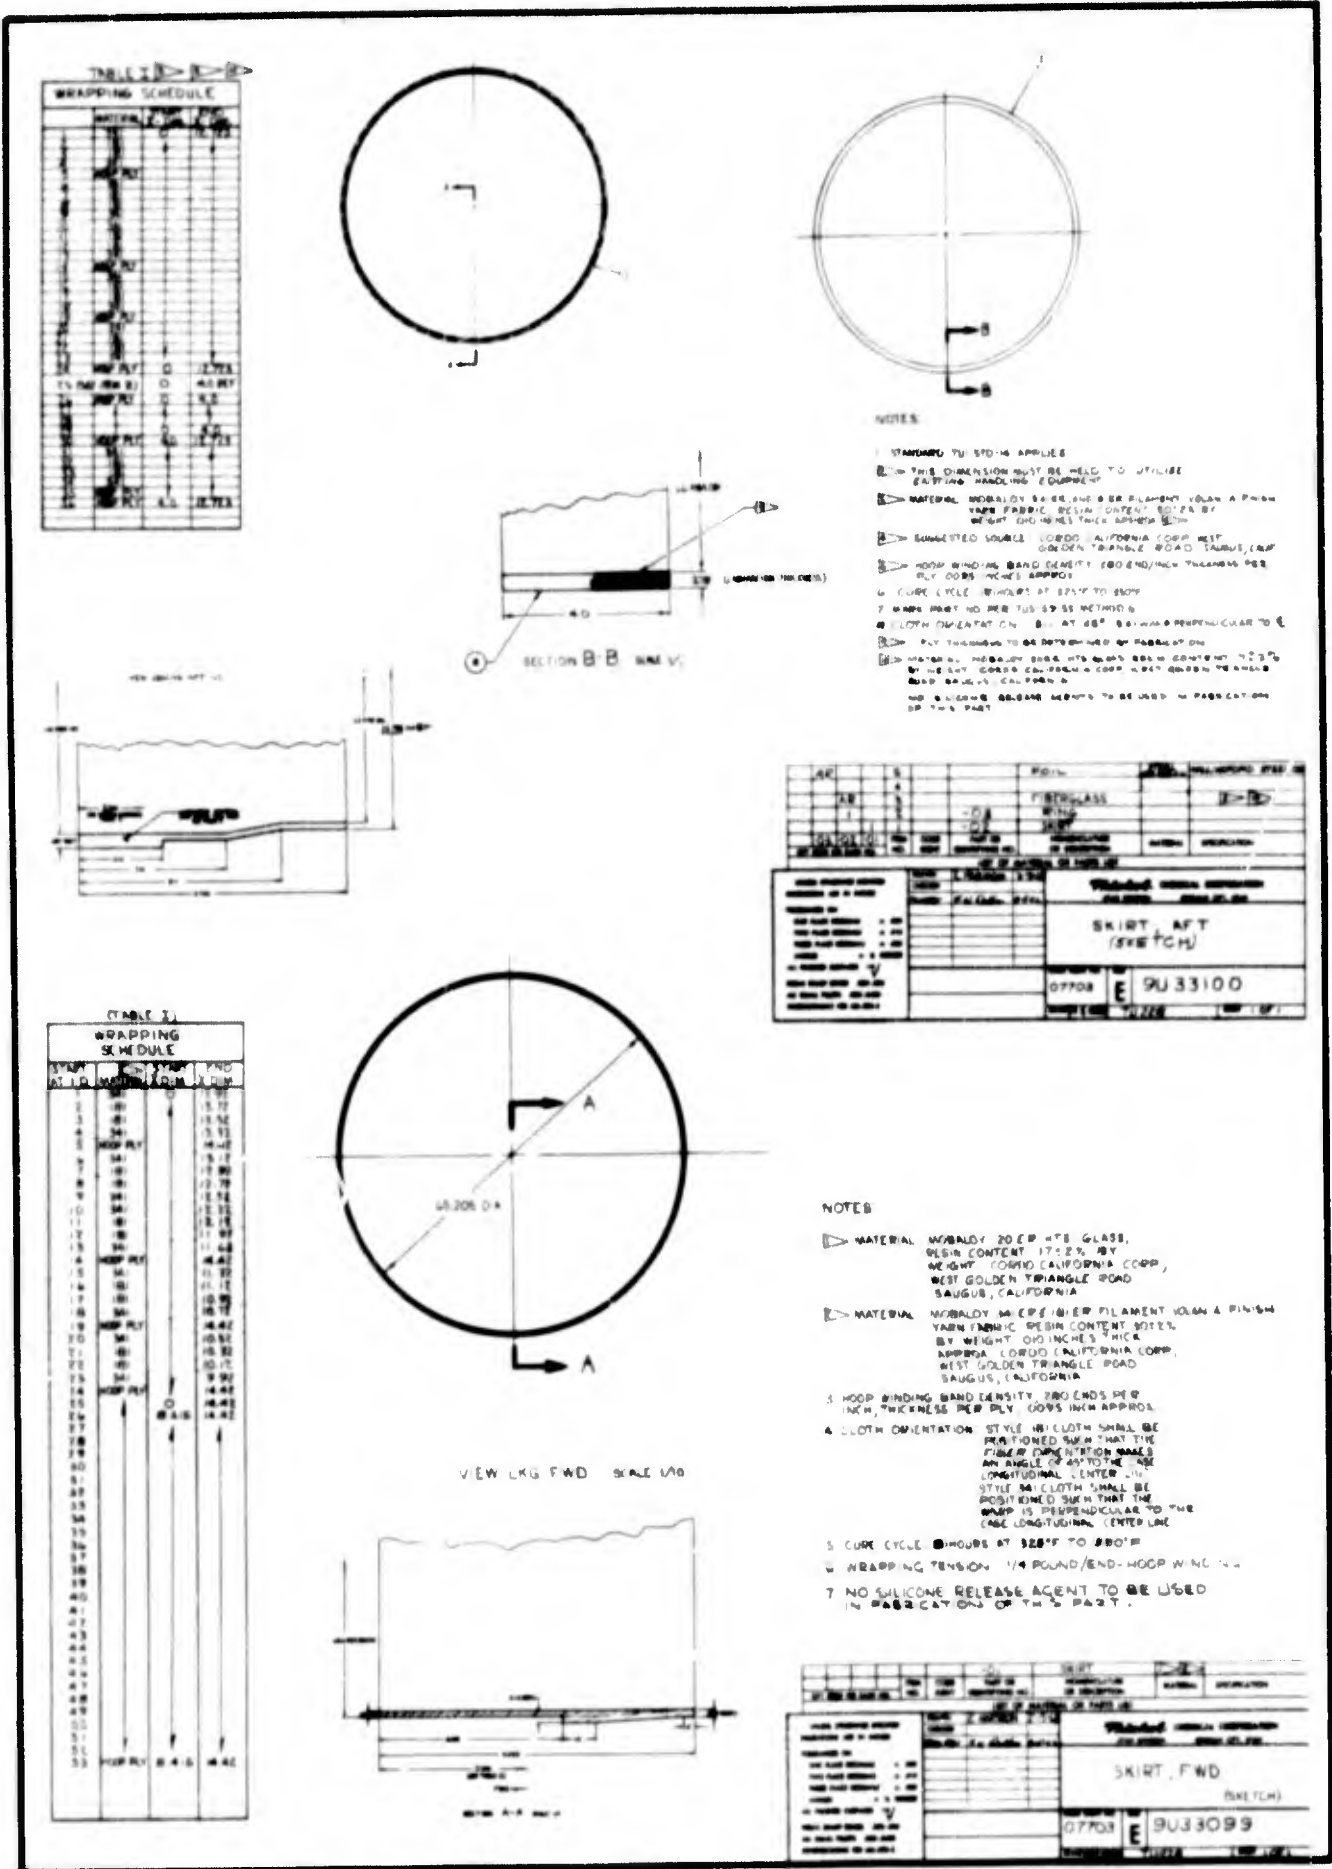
TU-228 Forward Skirt Drawing 9U33099 and Aft Skirt Drawing 9U33100
